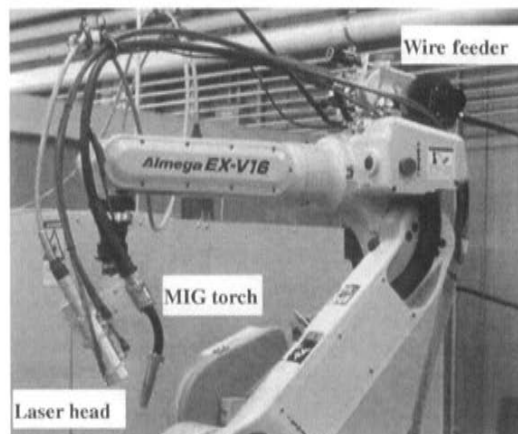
Diode laser and AC pulsed MIG arc hybrid welding system
